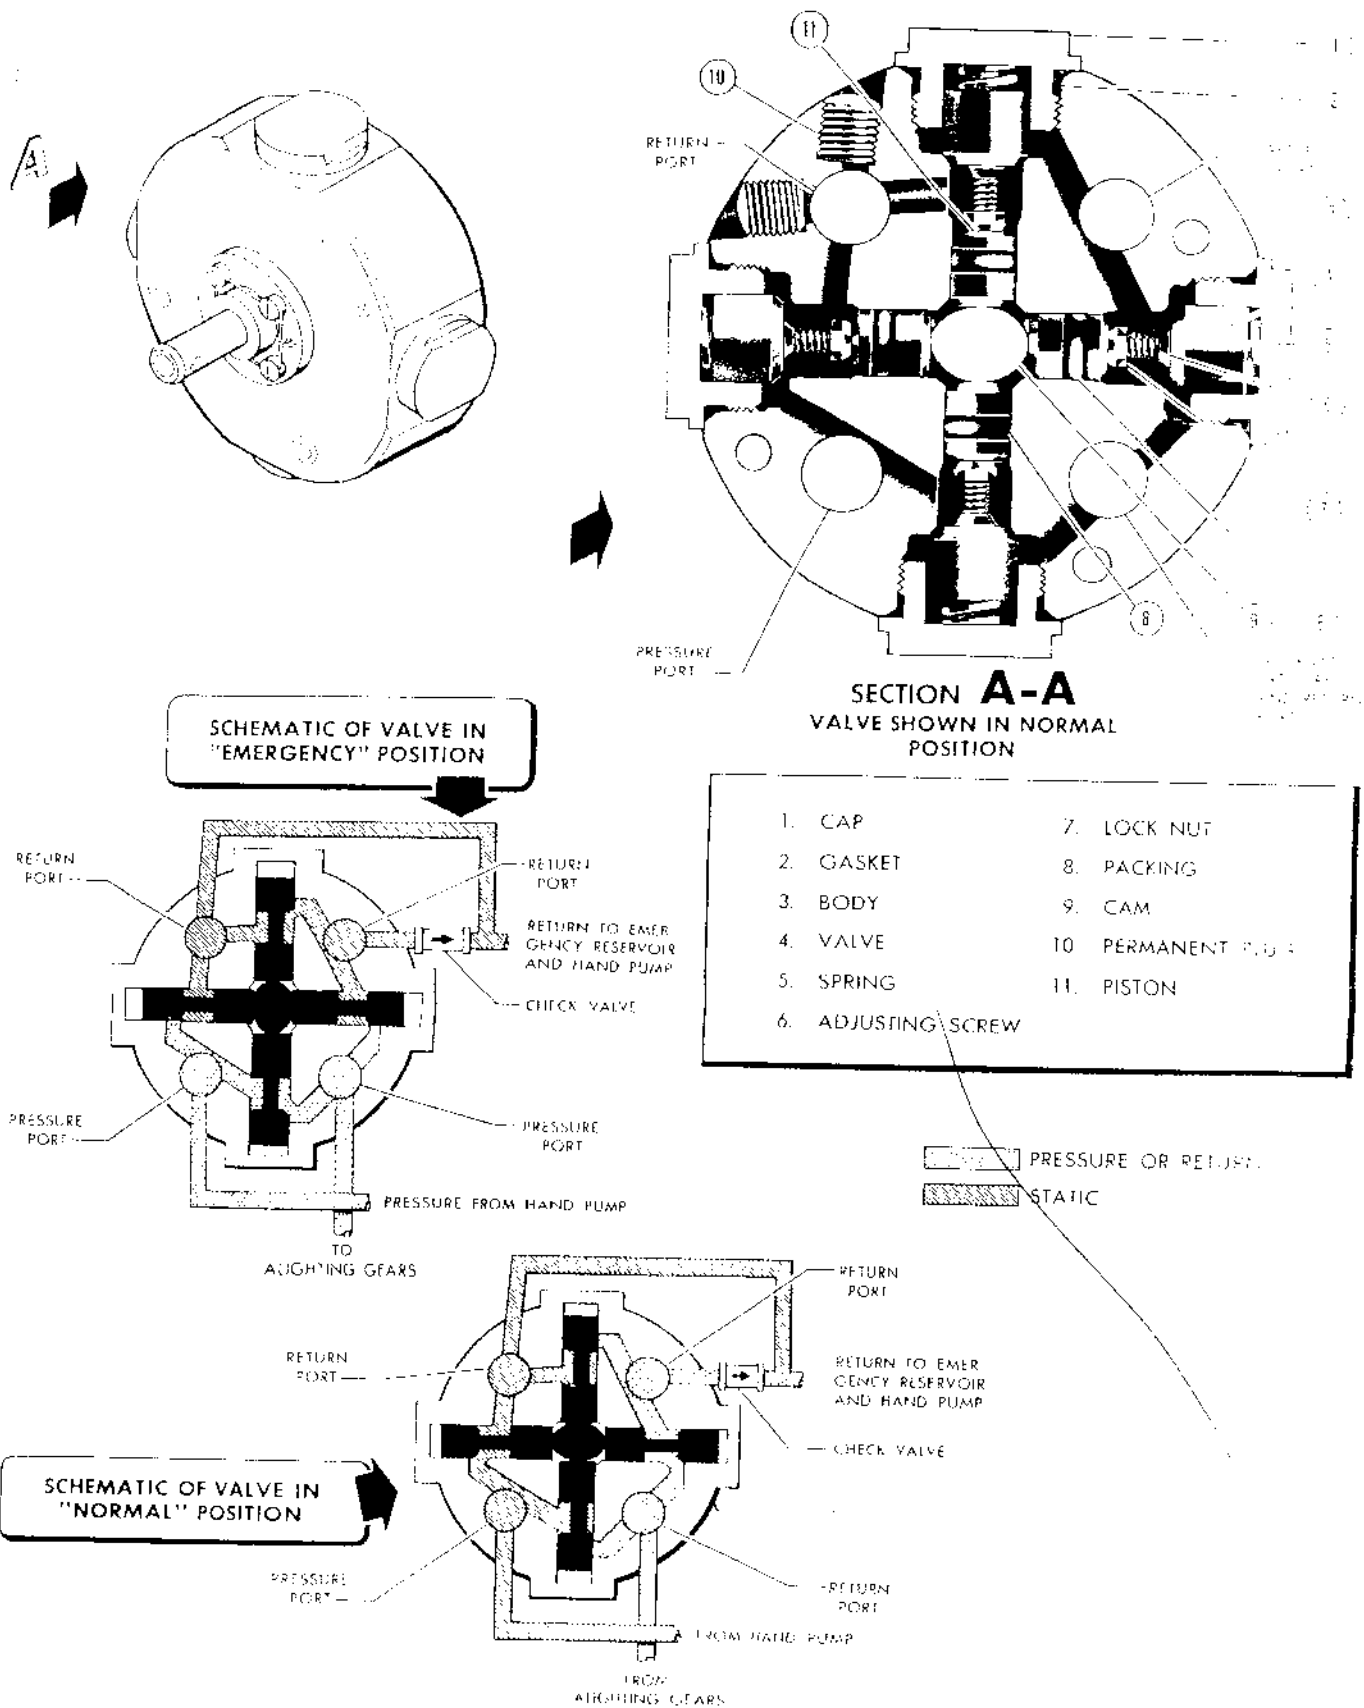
Alighting Gear Emergency Selector Valve, Airplanes Serial Nos. AF44-84992 through 44-85336
